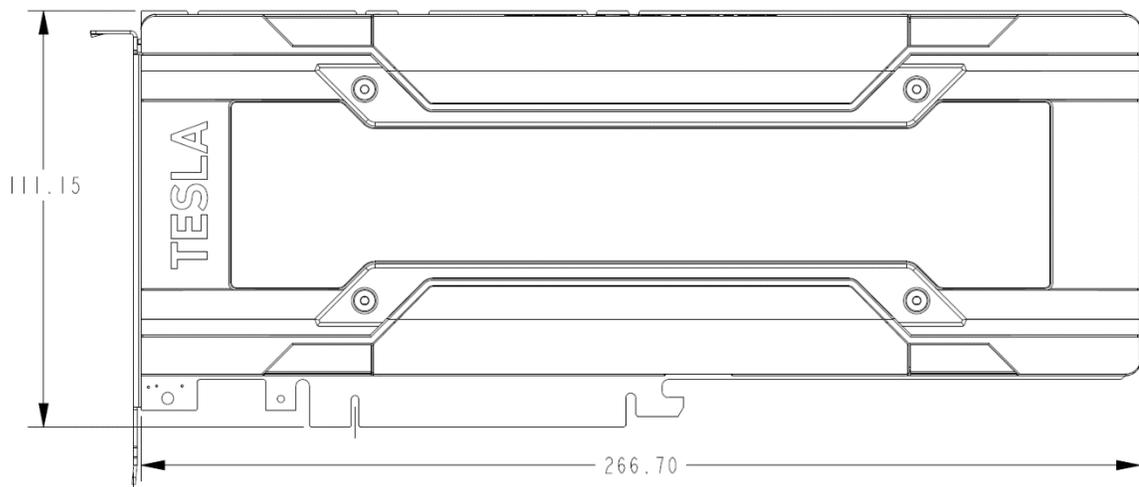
Tesla P100 PCIe Board Dimensions with Optional I/O Bracket
